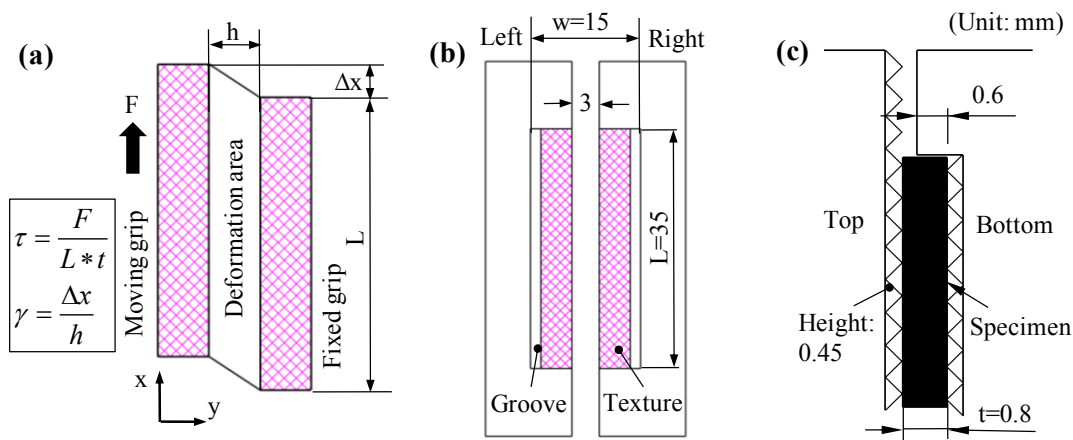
Schematic description of the SS test (b) grips with groove and texture design (front view) (c) side view after full clamping.
